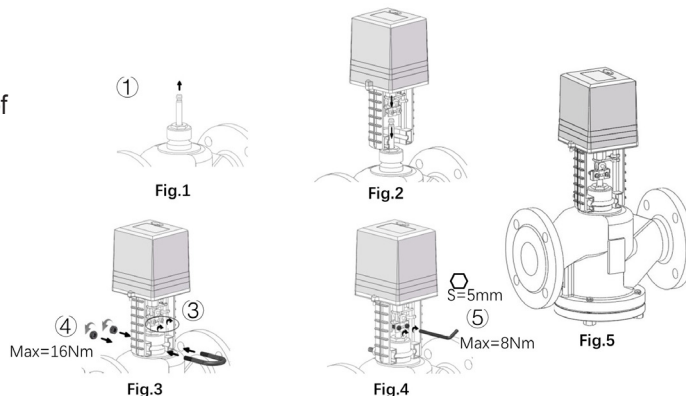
Connect the actuator rod to the valve stem (3). Before assembly, ensure that the actuator rod and the valve stem are tightly butted against each other with no gaps. Using a 5 mm hex key, pre-connect the clamp clips, but do not fully tighten the screws yet.
